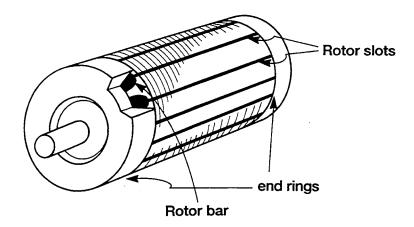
Schematic view of the rotor of a squirrel-cage induction motor. Rotor bars and slots can be seen where the end ring is shown partially cut away.
